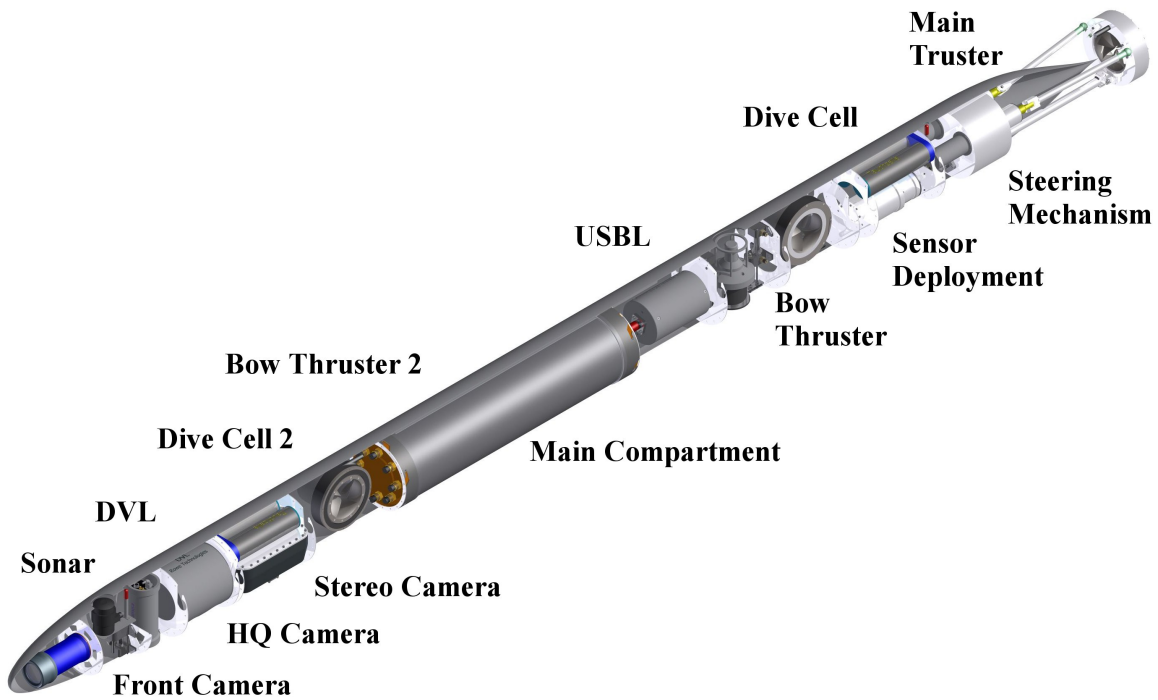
3D Drawing of the exploration AUV with sectional hull view .
